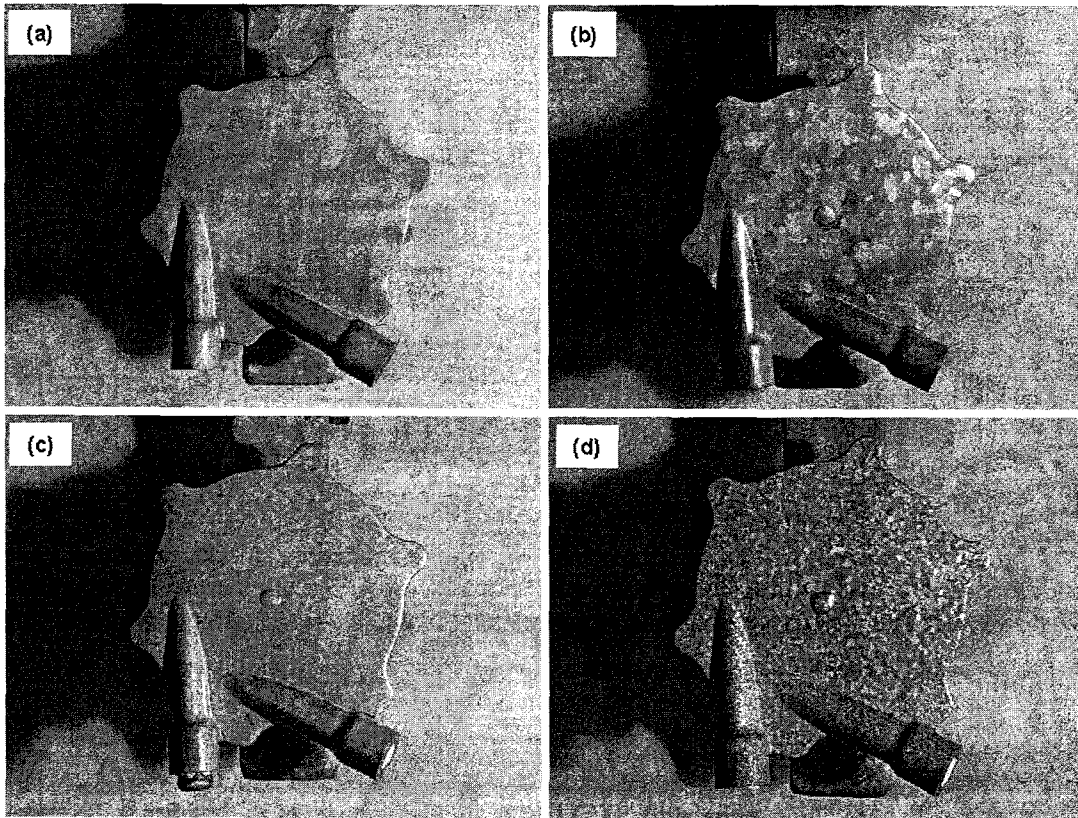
Macrostructure of nozzle casting. (a) XX, (b) VX, (c) XI and (d) VI casting condition
